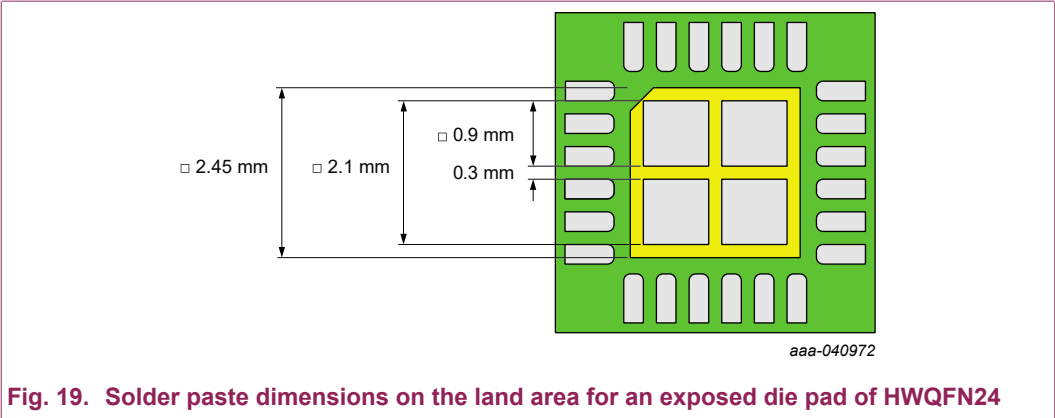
Solder paste dimensions on the land area for an exposed die pad of HWQFN24
